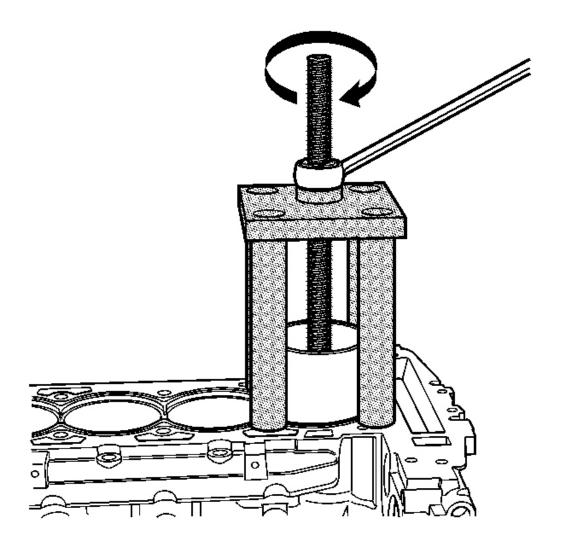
Removing Cylinder Bore Sleeve By Rotating Nut Courtesy of GENERAL MOTORS CORP.
